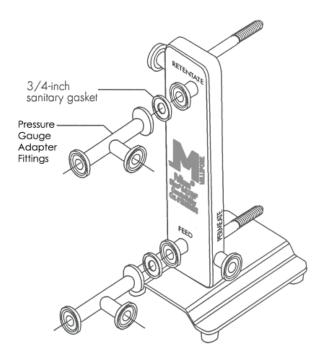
Installing the Gasket and Positioning the Pressure Gauge Adapter Fittings
